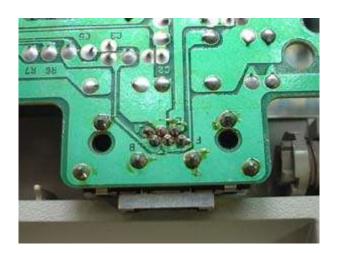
Under the PCB, there is an aluminum sheet (EMI shield sheet).
